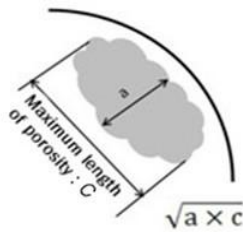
Illustration of a casting defect and its dimensions as measured on the fracture surface
